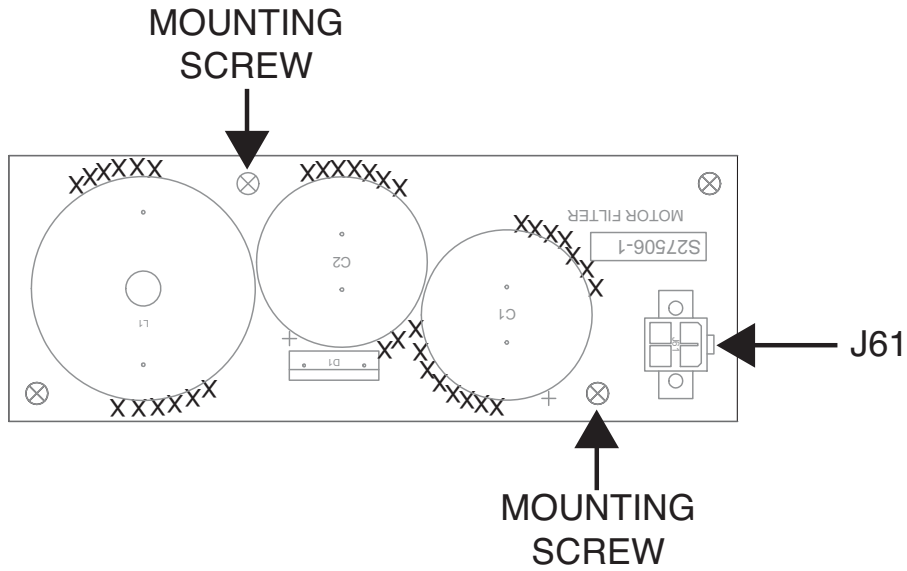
MOTOR FILTER BOARD CONNECTIONS
